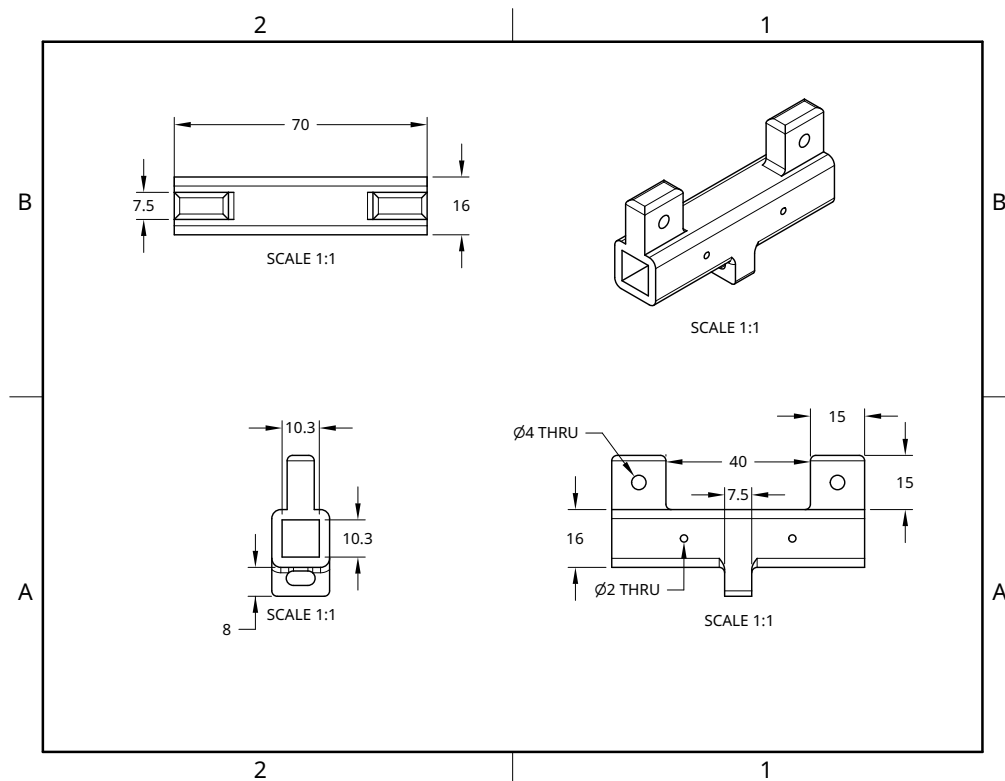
CAD drawing of the cart component of the catapult launcher. All quantities are given in millimetres.
